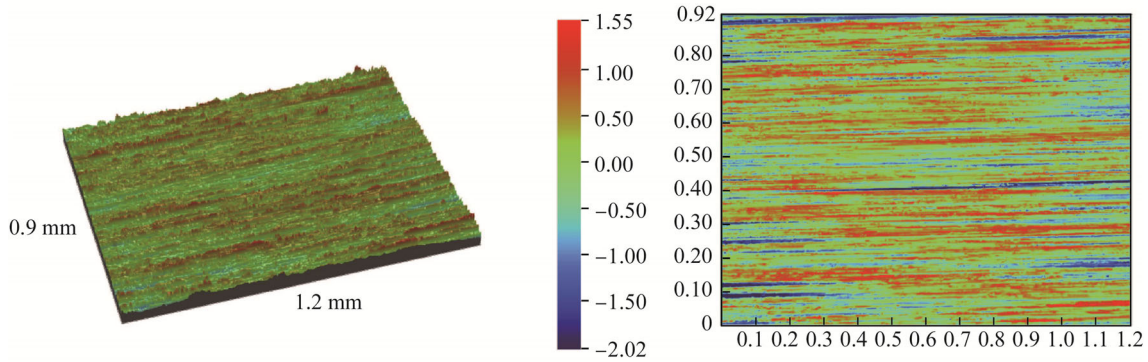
Surface textures of tungsten carbides after grinding with alumina wheel
